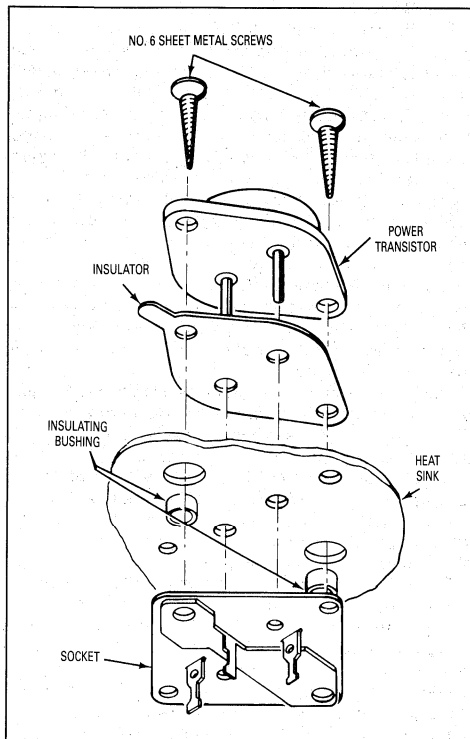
Hardware Used for a TO-204AA (TO-3) Flange Mount Part
